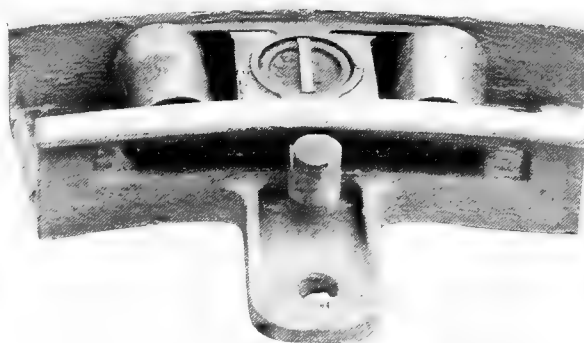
Susemihl Side Bearing for Freight Car Trucks, with Top Removed.
